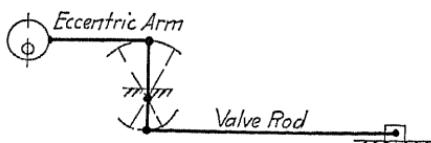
Rocker arm between eccentric arm and valve rod.
